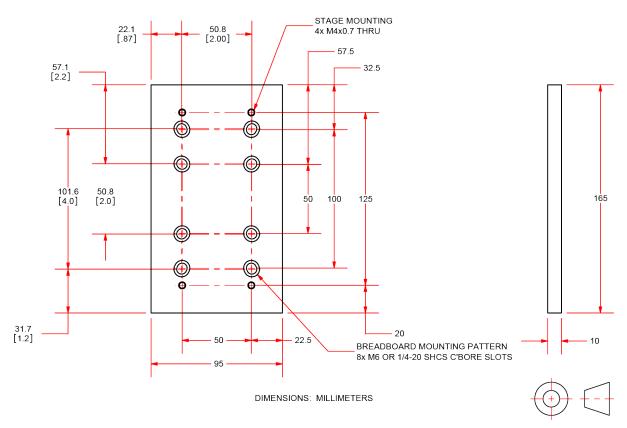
ANT95L-075 Mounting Plate (-MP) Dimensions
